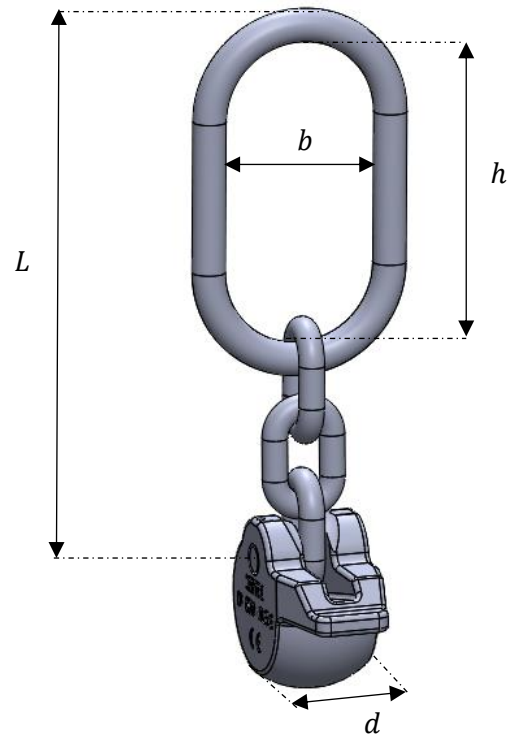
Starcon lifting eye flexible coupling dimension sketch.
